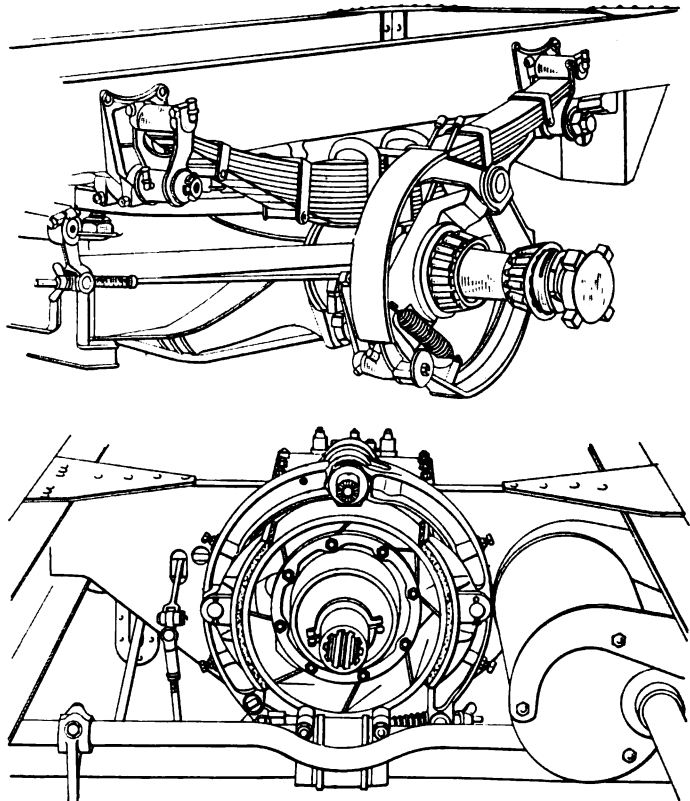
TWO VIEWS OF THE BRAKE USED BY THE PACKARD COMPANY
